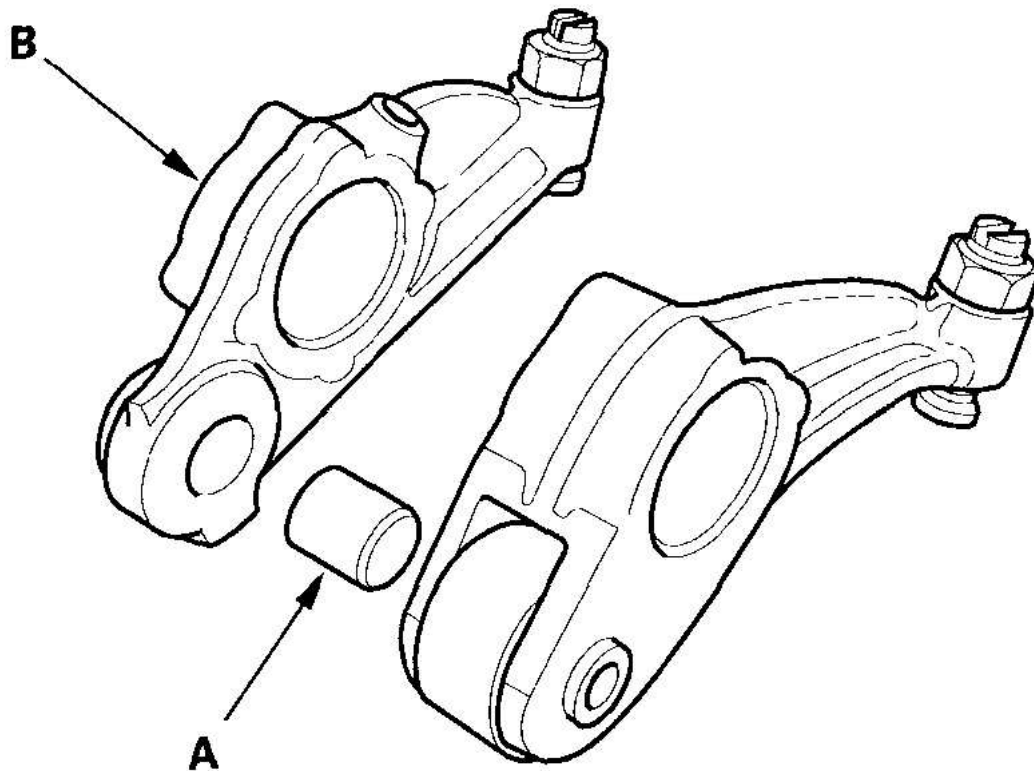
Identifying Rocker Arm-To-Shaft Clearance
